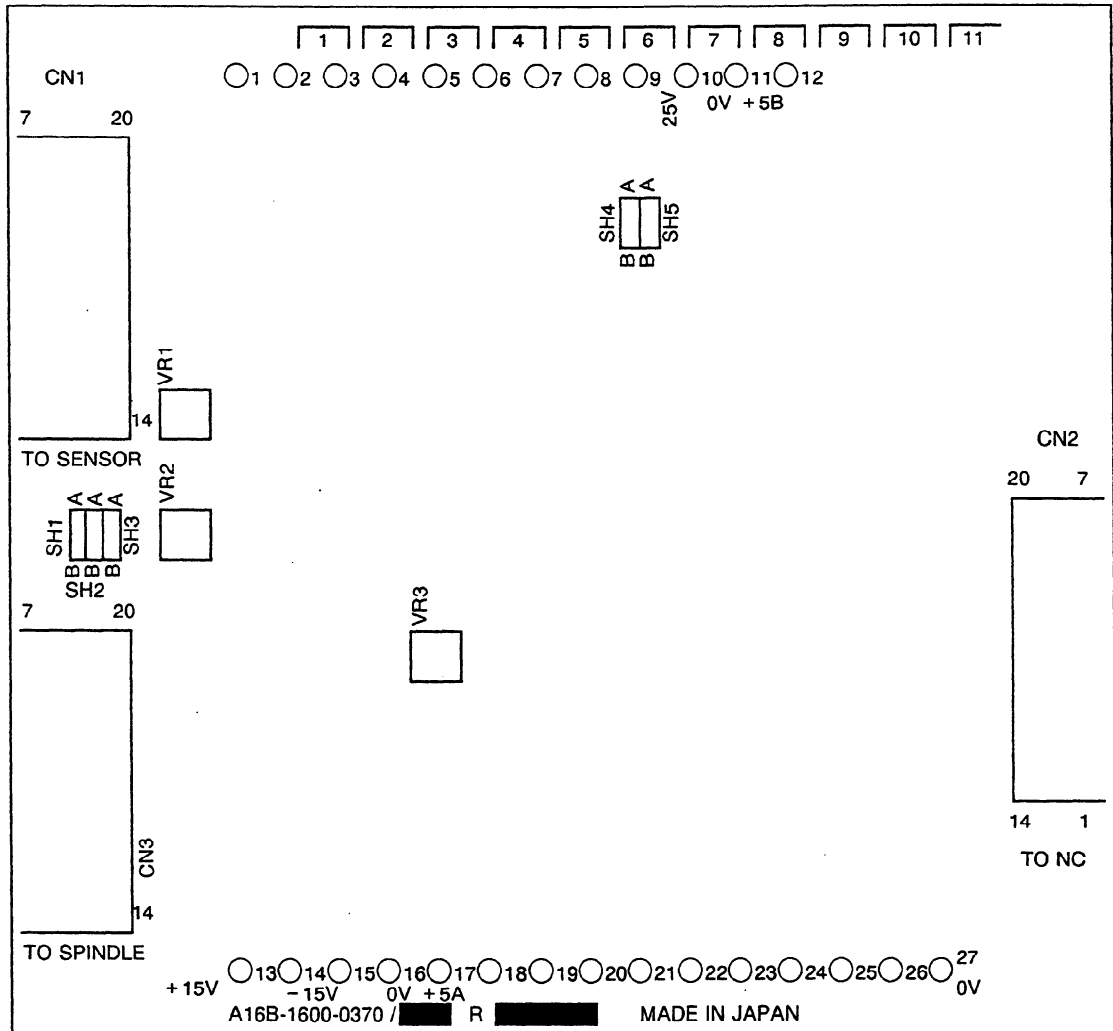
(b) Mounting Positions of Jumpers, Variable Resistors, and Test Points (PCB drawing No.: A16B-1600-0370)
